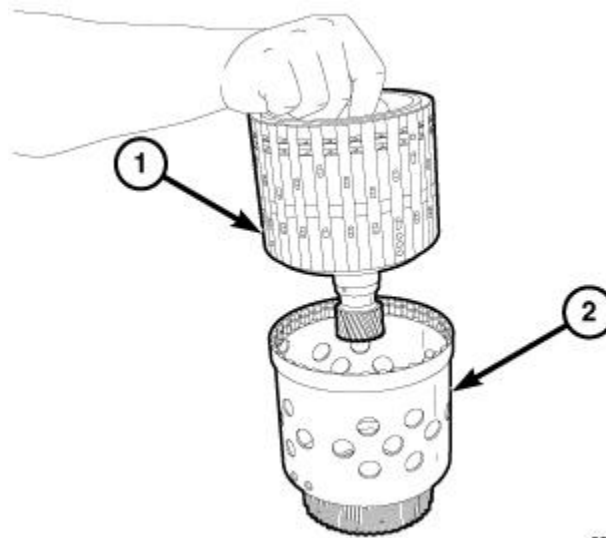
P4 Sun Gear/C/E Clutch Retainer & D-Clutch Drum
